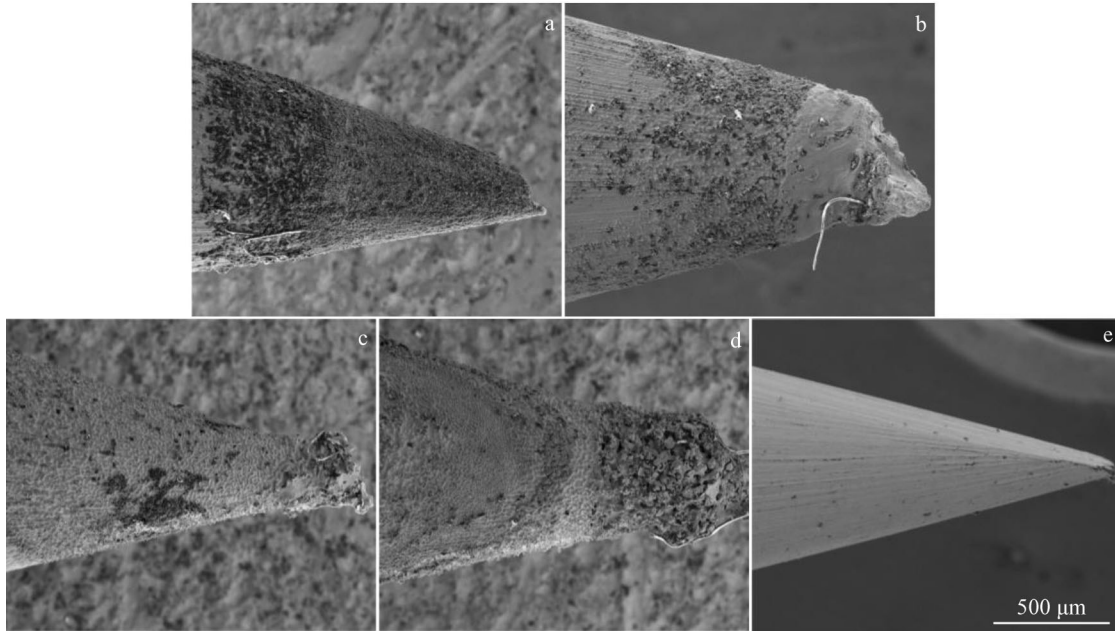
Burnout macromorphologies of the electrode tip with different welding time: (a) W-1, 1 h; (b) W-1, 2 h; (c) W-2, 1 h; (d) W-2, 2 h; (e) without welding
